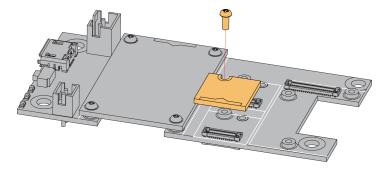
RAK1905 WisBlock 9-Axis Module mounting
